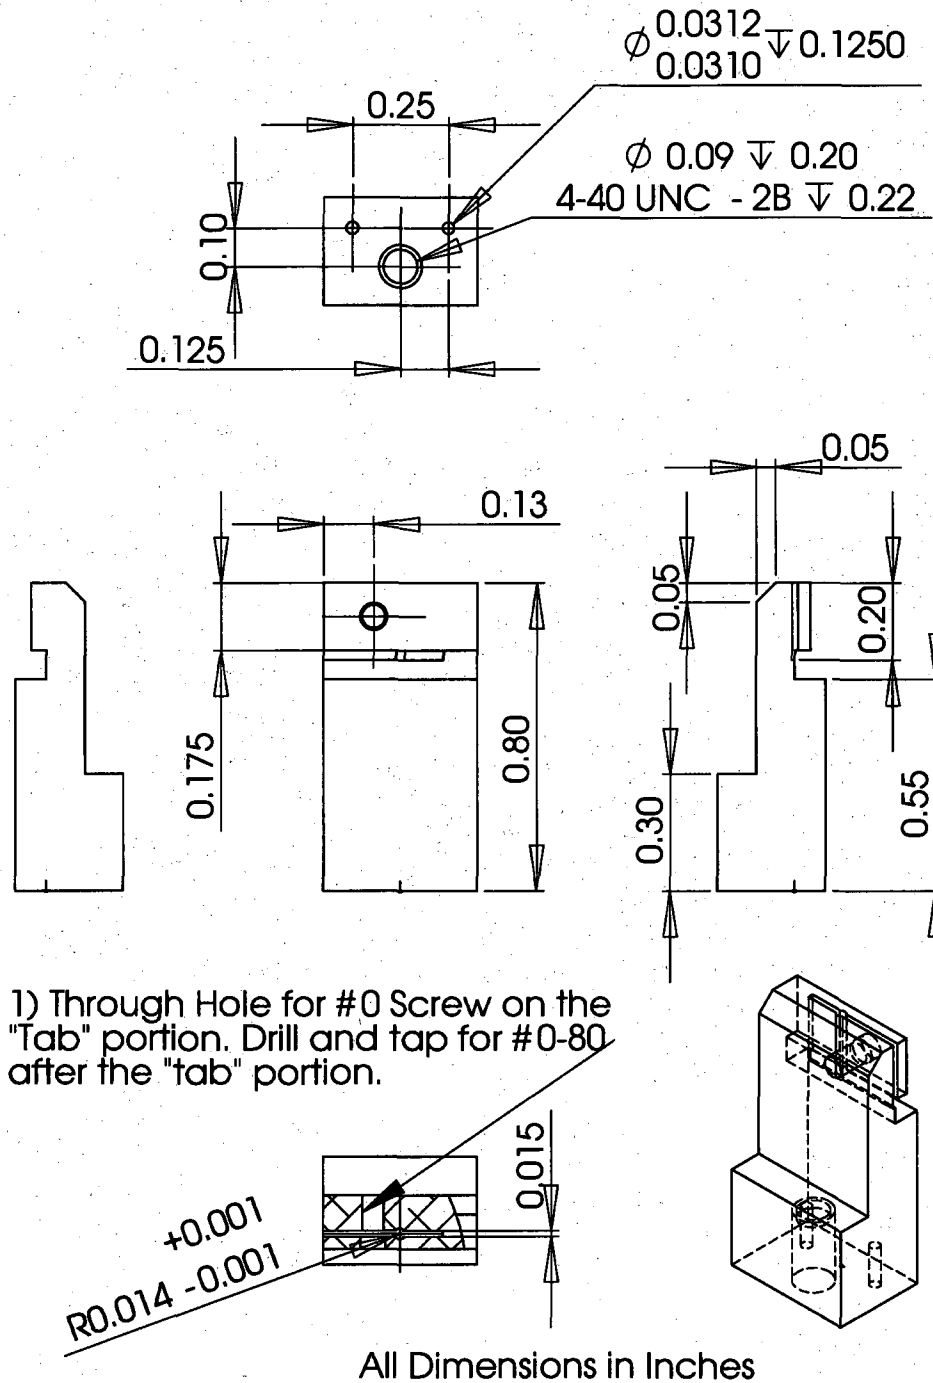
Mechanical Drawing: Pendulum vertical wire mount.
